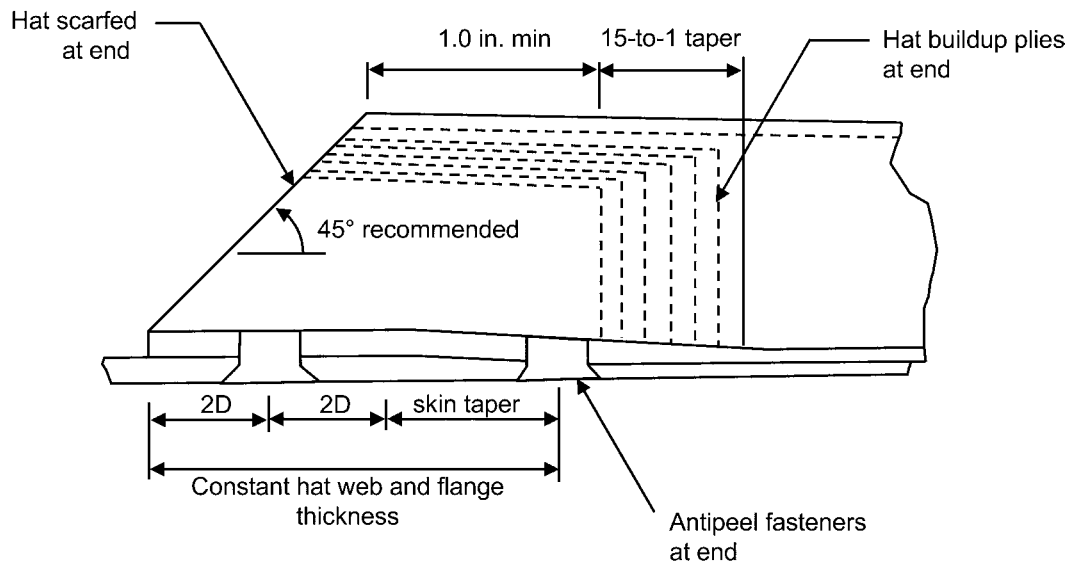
Bonded-bolted joint to prevent peel failures
